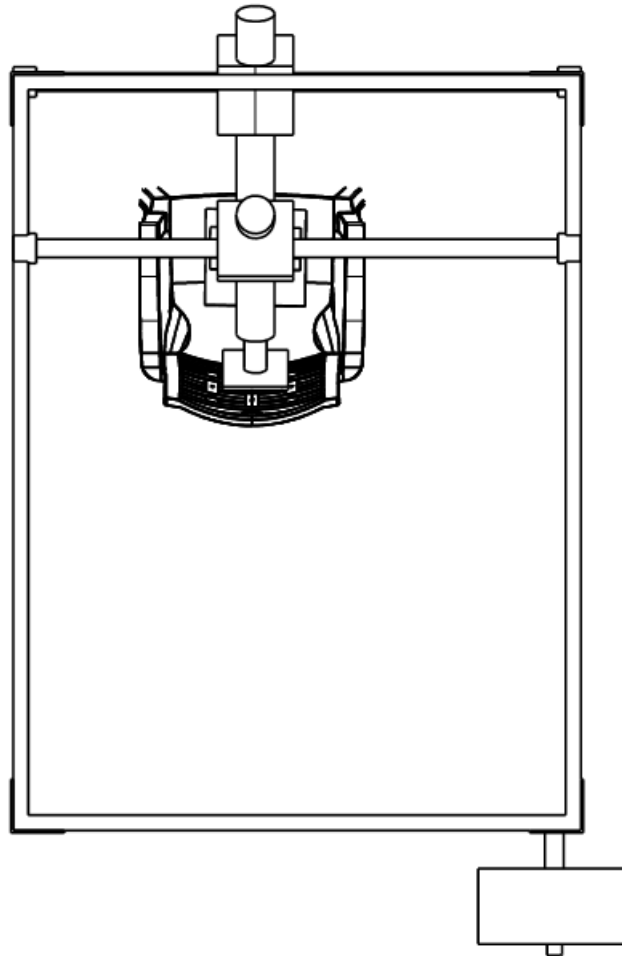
shows front view of machine control panel, back view of plastic chair and first piston.
